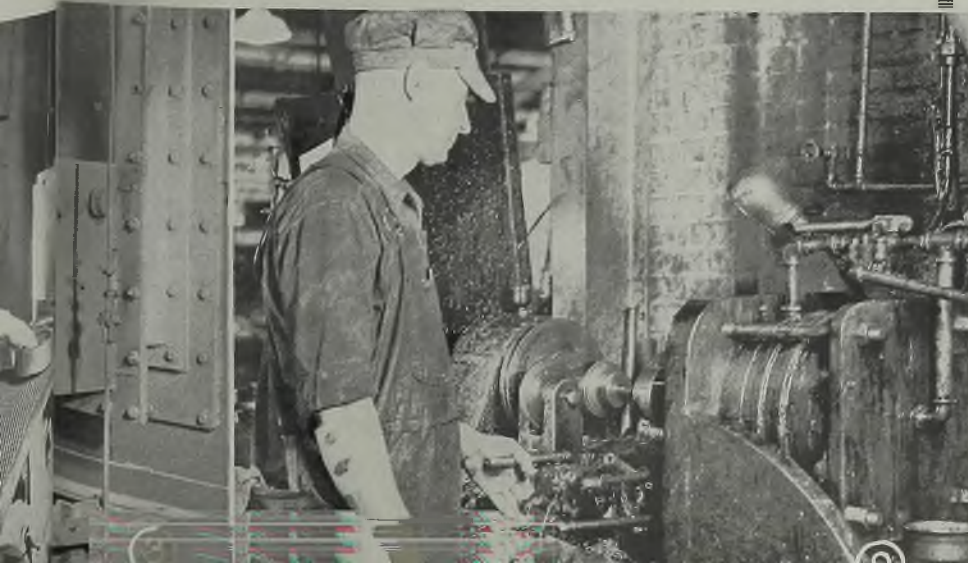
Inspection of roll-formed belt-contacting surfaces is done on setup using dial indicator mounted on stand and positioned against surface. Rotating work by hand determines position and amount of any "out-of-round" which is corrected while work is still on this fixture
